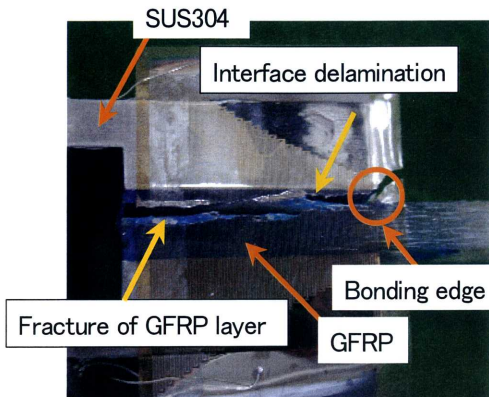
Fracture surface of virgin adhesive joints.
